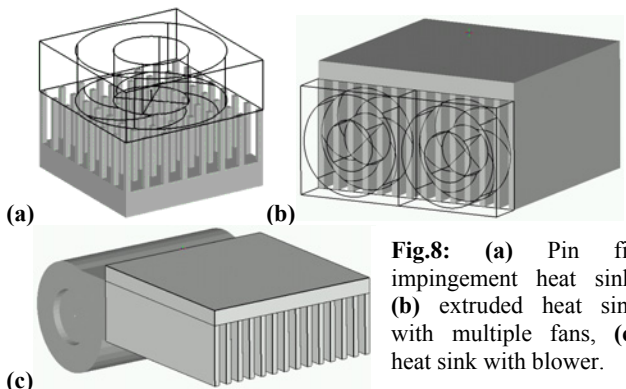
(a) Pin fin impingement heat sink, (b) extruded heat sink with multiple fans, (c) heat sink with blower.
